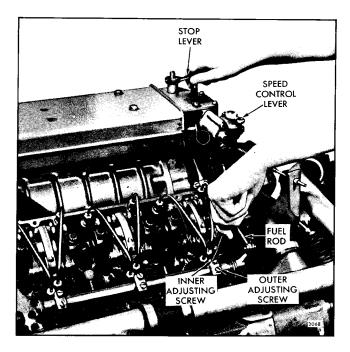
Positioning No. 3L Injector Rack Control Lever
